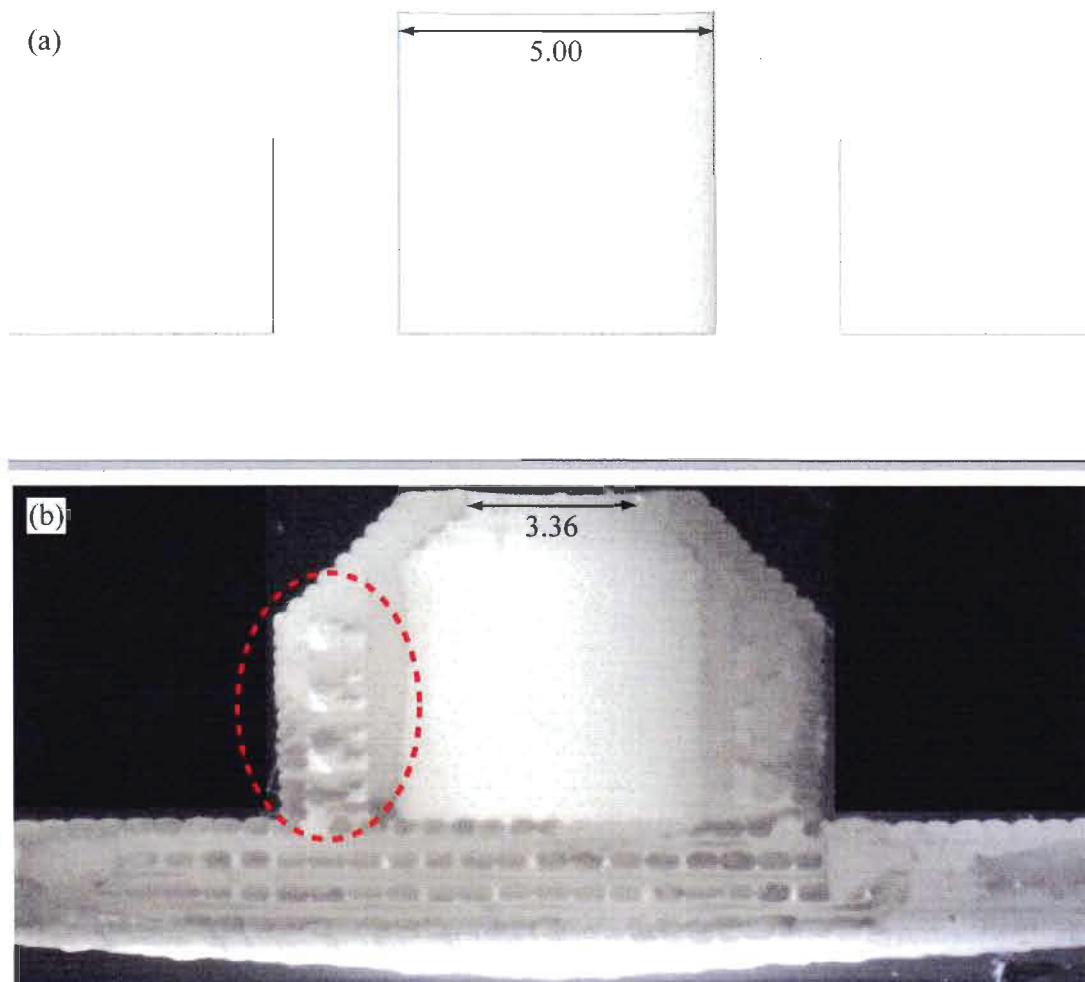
Vertical cross-sectional view of Structure 2 (a) Drawing of design, (b) photograph of cut cross section of the *uPrint* part (dimensions in mm). Dotted area highlights the empty spaces within the part.
